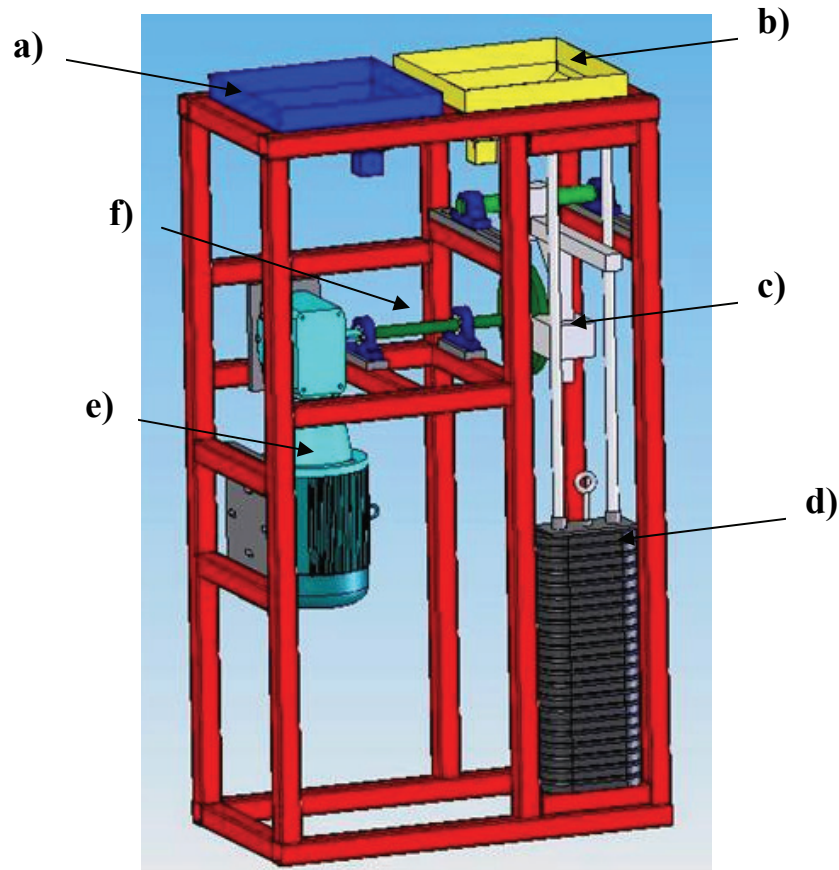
SWAT Machine. a) water bin, b) ore bin, c) sample holder, d) weight stack, e) motor and gearbox assembly and f) instrumented drive shaft.
